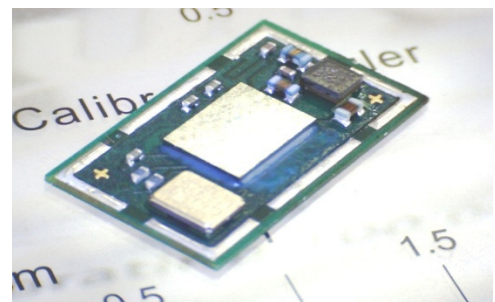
A typical implant module obtained using standard PCB assembly techniques
